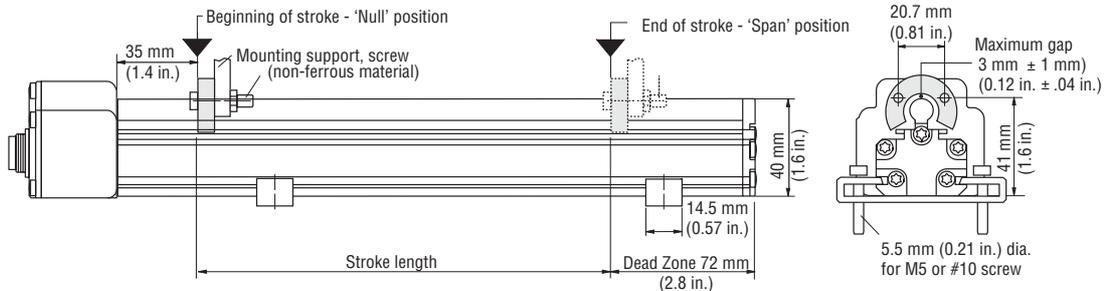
E-Series Model EP sensor dimension reference (Shown with Style M open-ring magnet)
